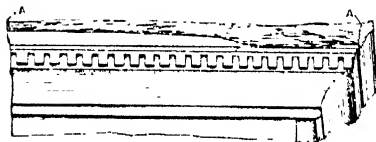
Portion of Side Cornice Moulding with Piece Broken Out (A to A)
